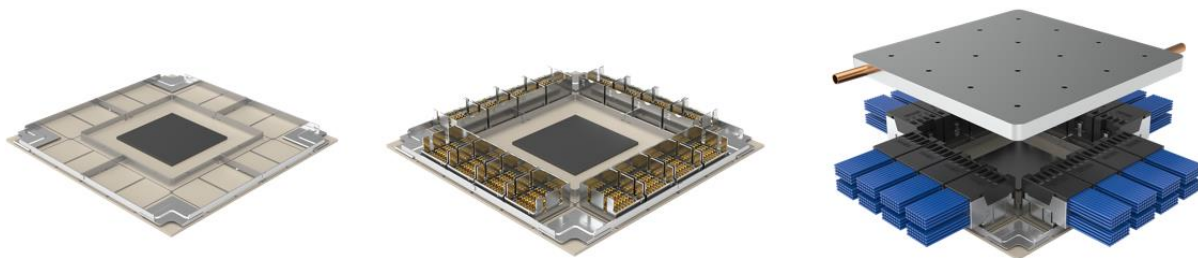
Si-Fly HD processing requires the non-solder ball connectors to be attached to a supported substrate. Cables are then plugged directly into the chip package. Specific solder, stiffener (left), and assembly process (center) varies by application before adding cables and installing cooling plate hardware (right).
